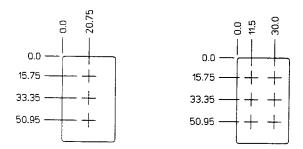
MODULE REAR 3 & 6 COMPONENT GRIDWORK, 1 SLOT MODULE
